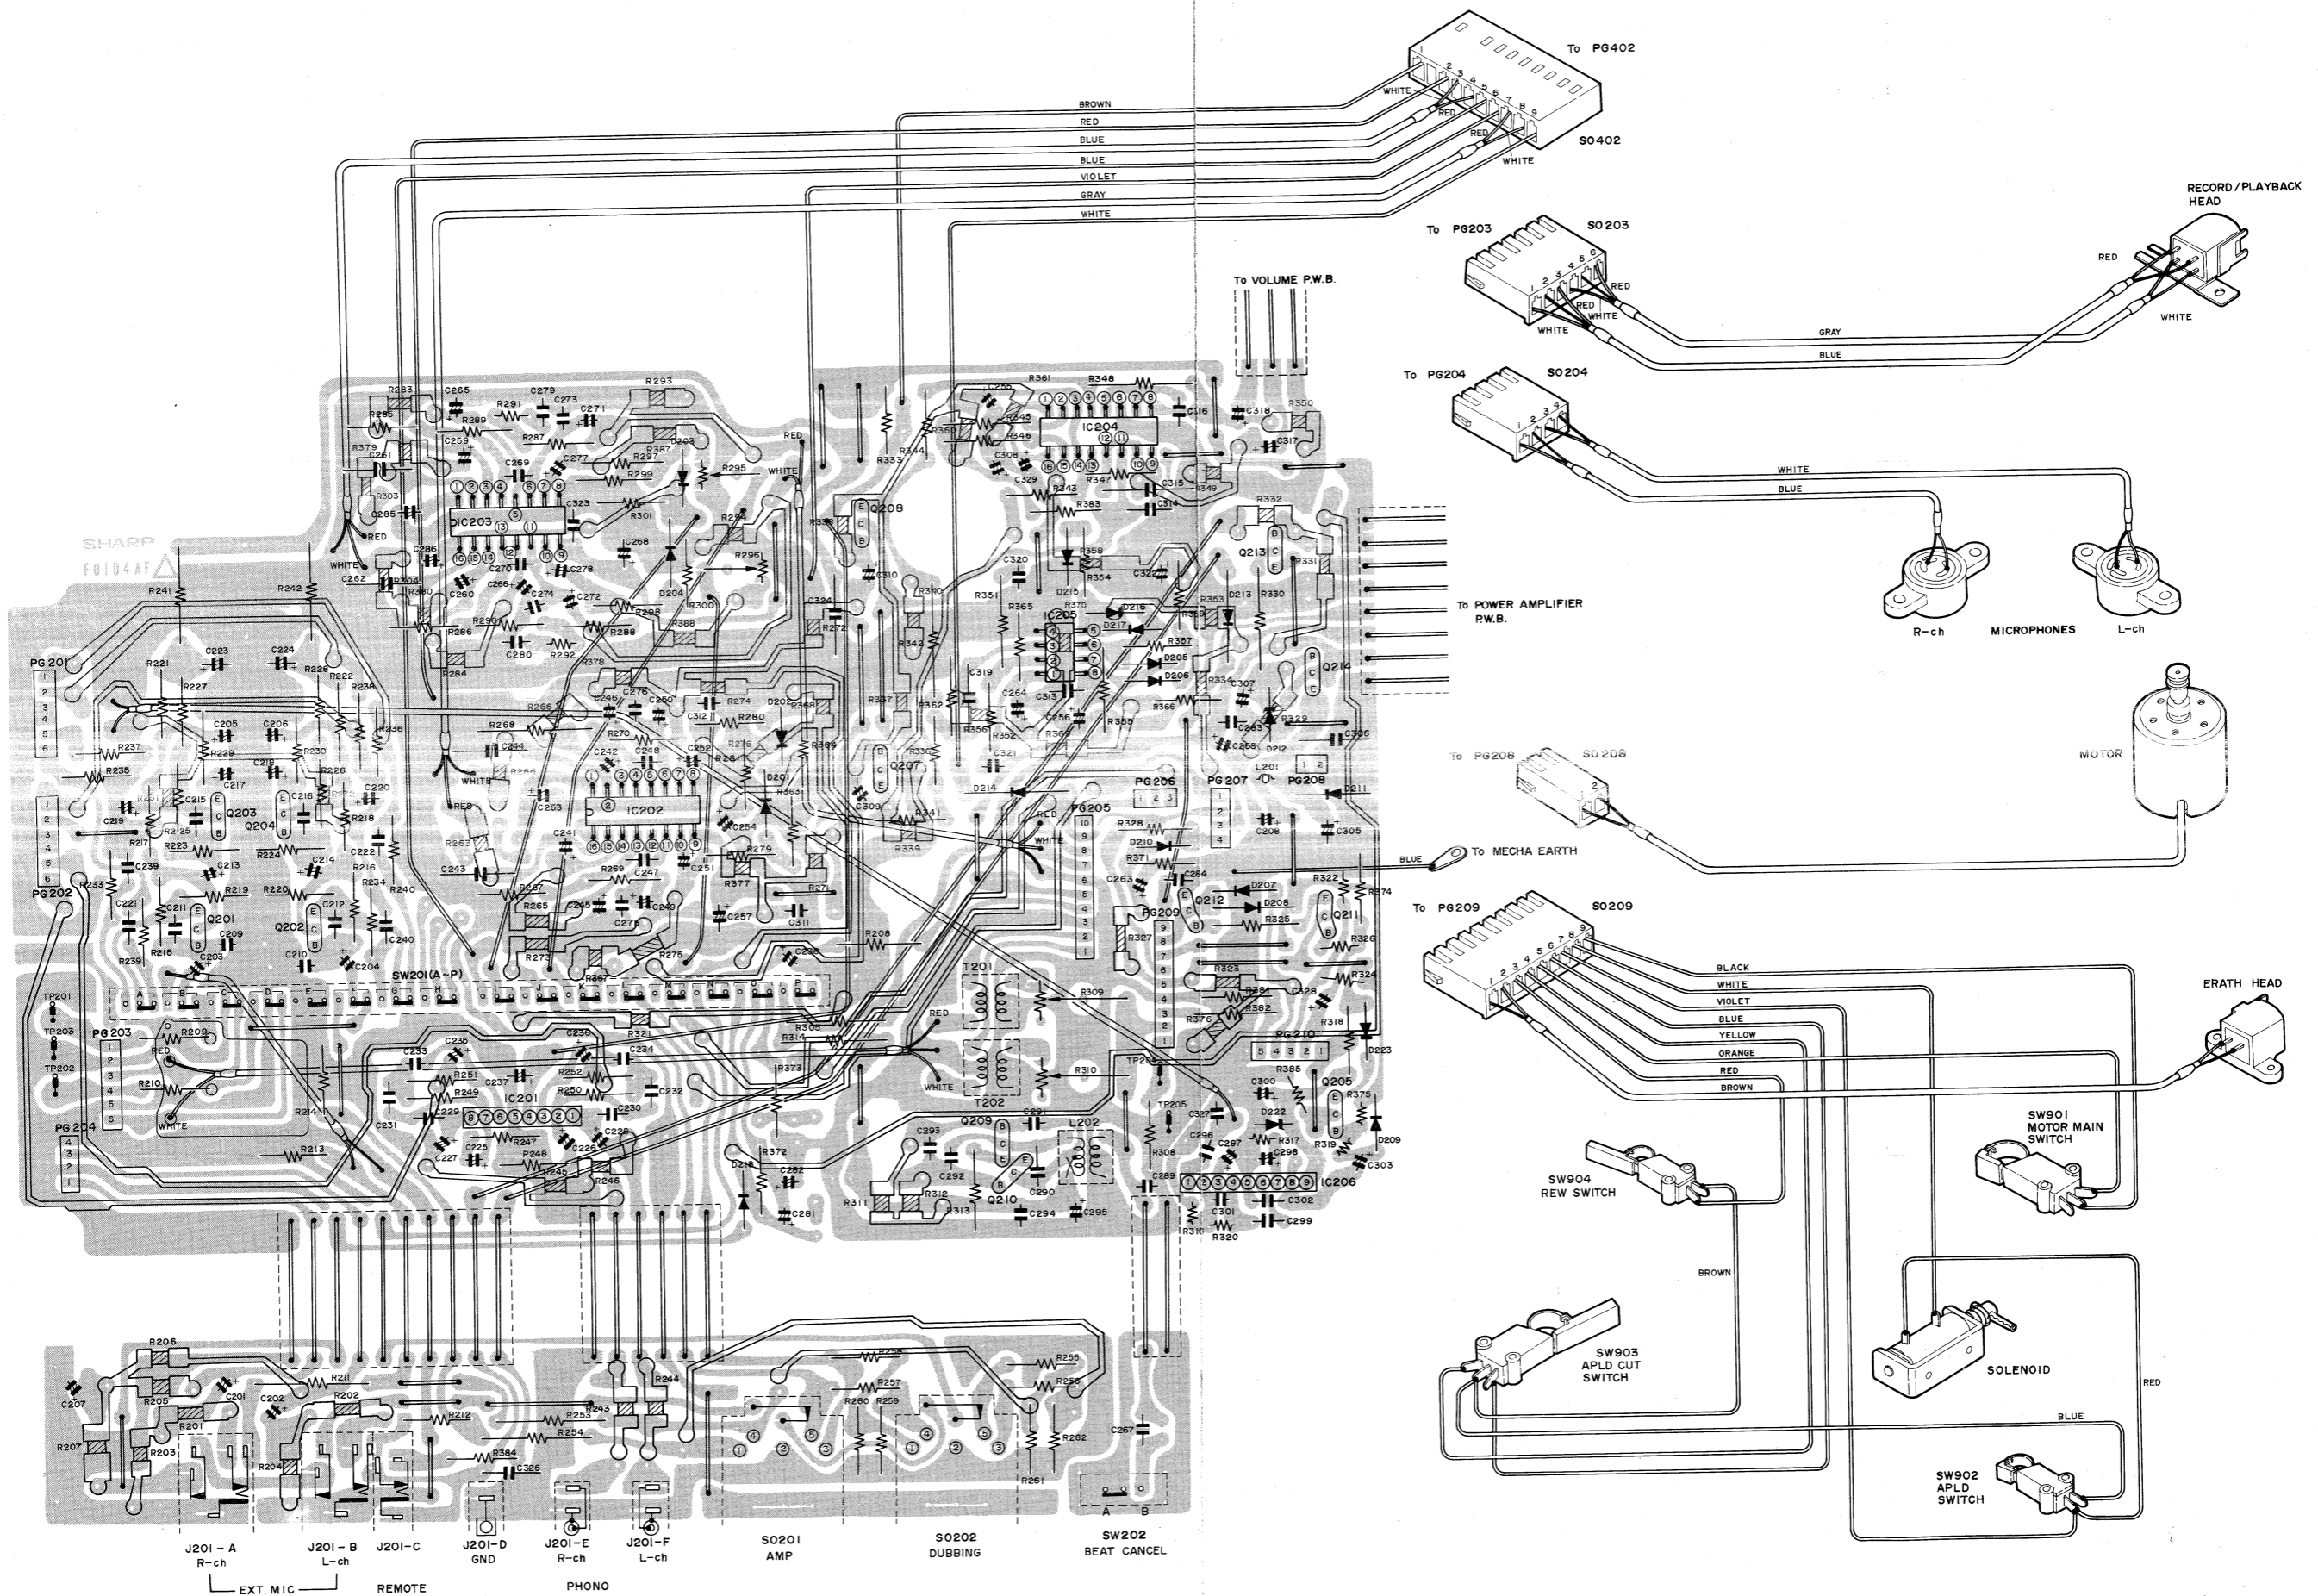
WIRING SIDE OF RECORD/PLAYBACK CIRCUIT AND SOCKETS PRINTED WIRING BOARD
